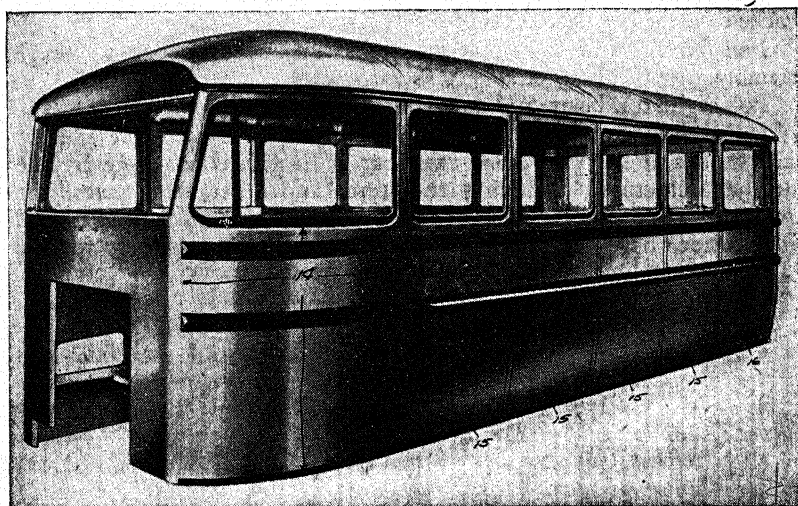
Type of school bus body to which arc welded construction was applied.
